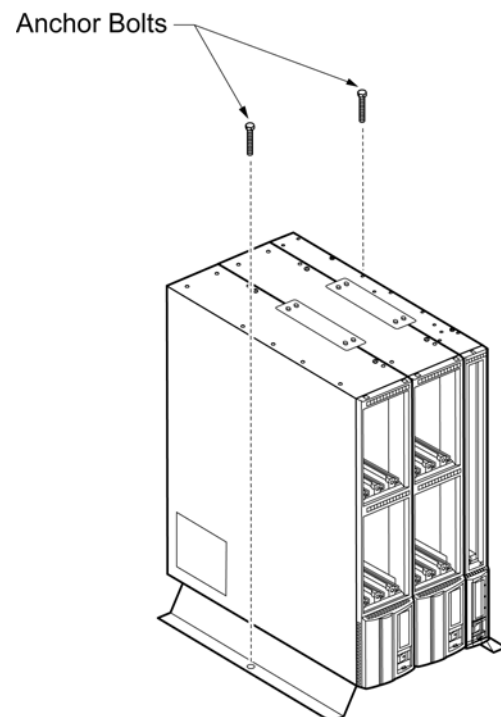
CHS1U-AU+CHS2U-AUx2 Chassis Configuration
